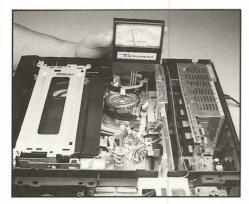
Check the back tension on the supply reel using a tension gauge.
